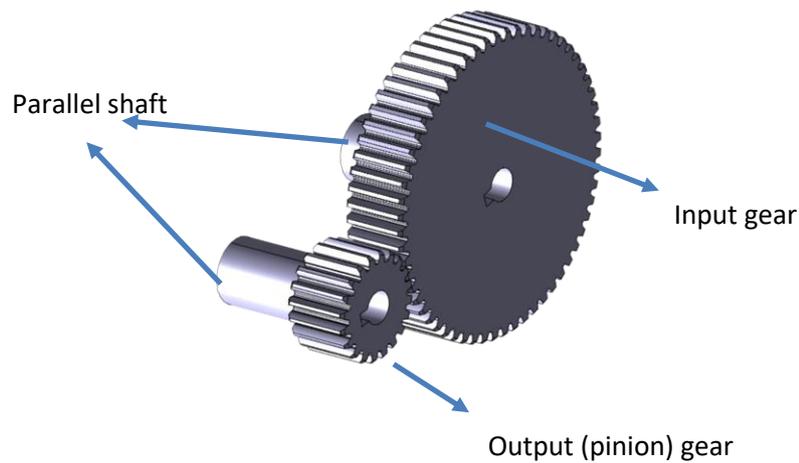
Schematic illustration of a parallel gear stage using spur-type gears.
